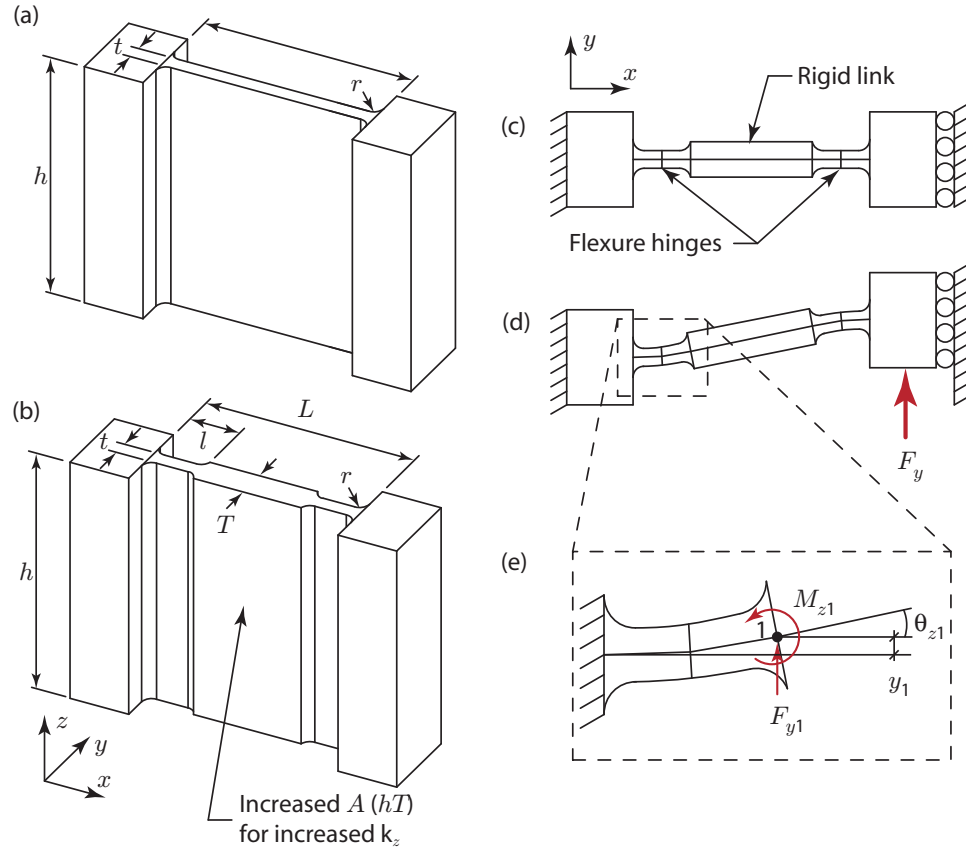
Beam flexure design: (a) trimetric view of constant cross section corner-filletted flexure beam, (b) trimetric view of corner-filletted serial-compliant flexure, (c) top view, (d) top view with applied load, and (e) expanded view of corner-filletted flexure hinge.
